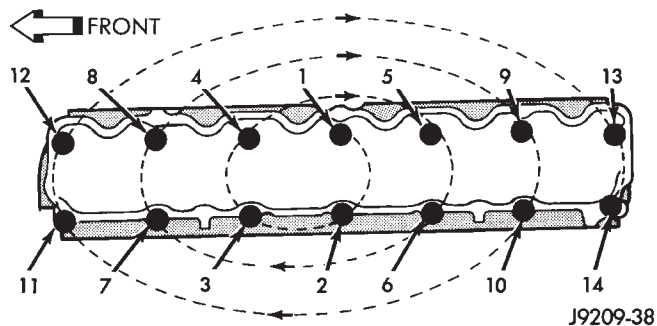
Engine Cylinder Head Bolt Tightening Sequence
